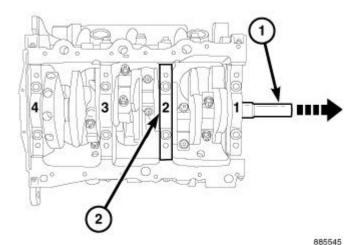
Main Bearings Assembly Courtesy of CHRYSLER LLC
